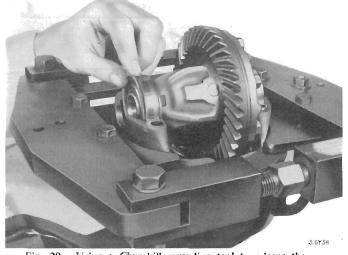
Using a Churchill spreading tool to release the differential carrier
